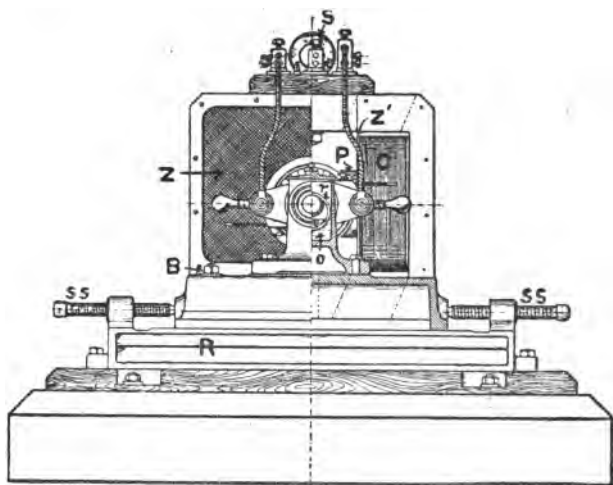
Lahmeyer Machine. (End elevation: part section.)
